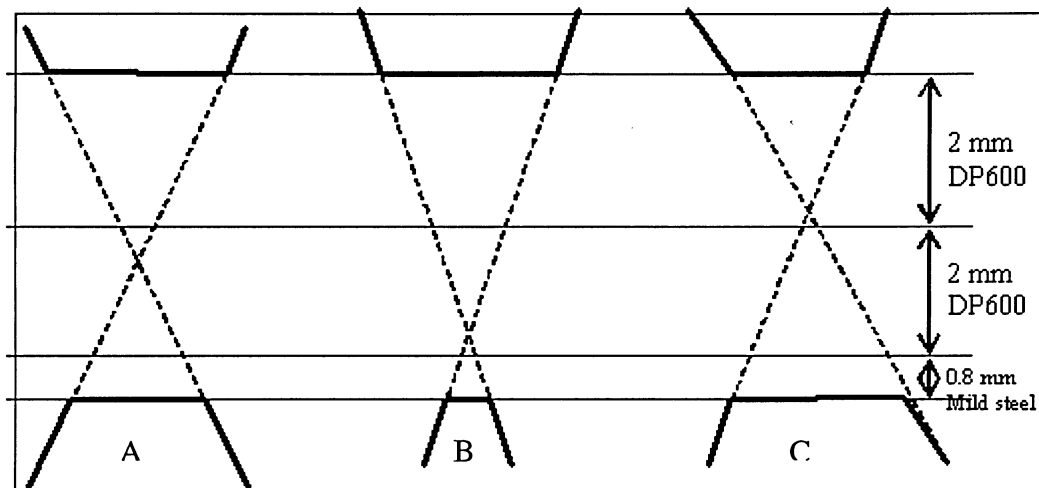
Schematic heat balance weld tip design⁹
